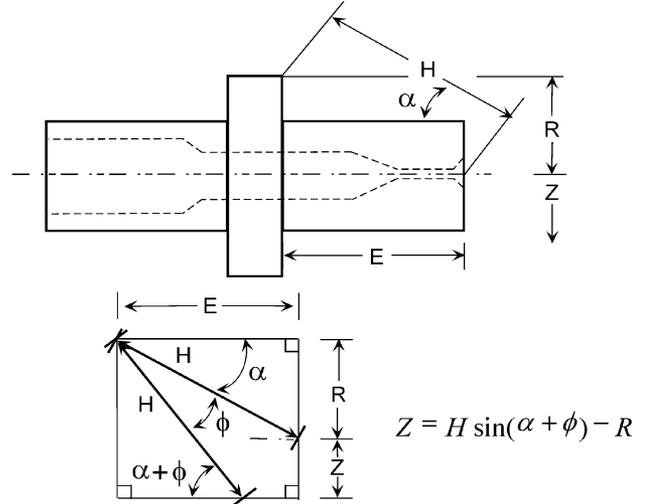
Geometry of fiber tip motion due to angular rotation of ferrule about the weld.
